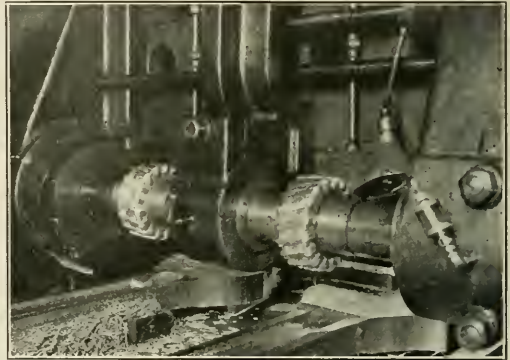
Powerful Slab Milling Machine Used for Channeling Rods
